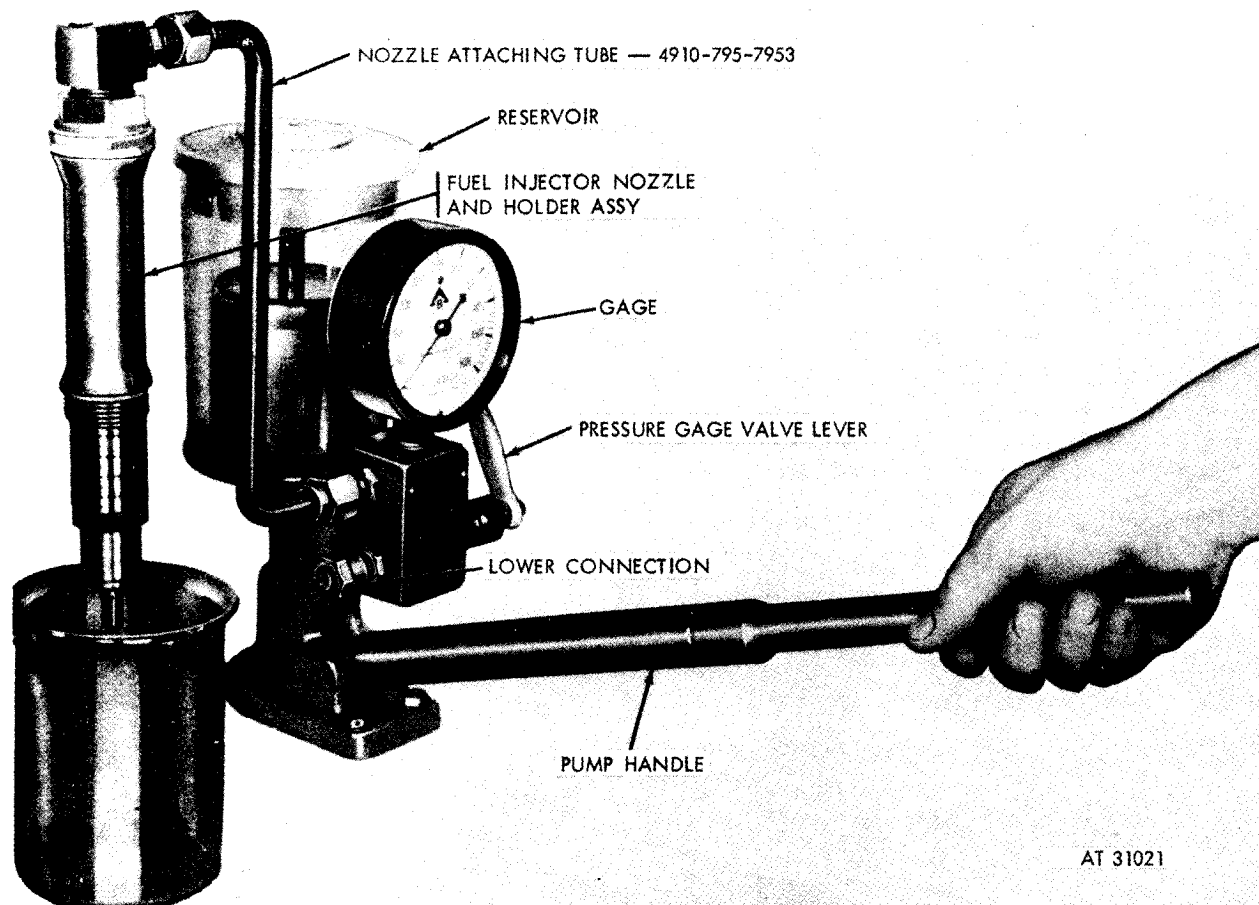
Testing fuel injector nozzle and holder assembly.
